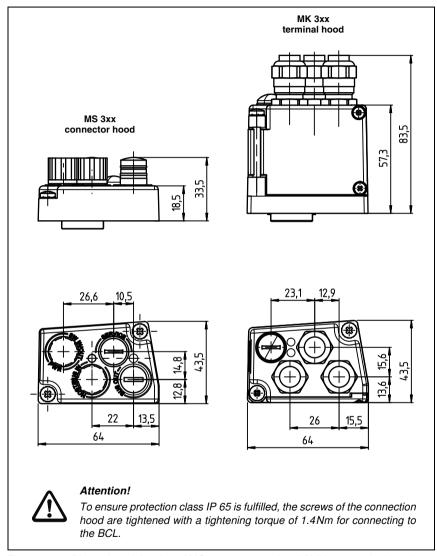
Dimensioned drawing of MS 3xx connector hood / MK 3xx terminal hood
